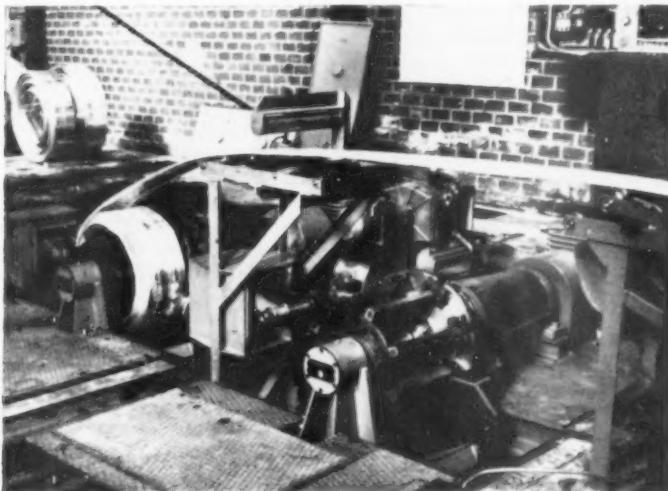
The 9-mm. strip being coiled on Coiler No. 2. Coiler No. 1 standing by to accept the next coil. Behind the coilers the contact rollers. In the background, finished coils
